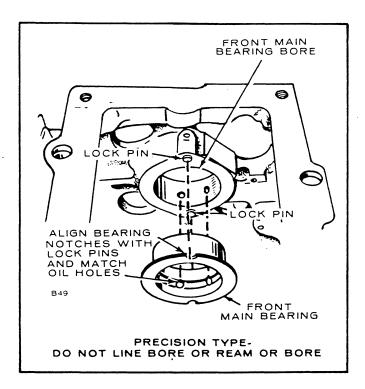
FRONT MAIN BEARING INSTALLATION
